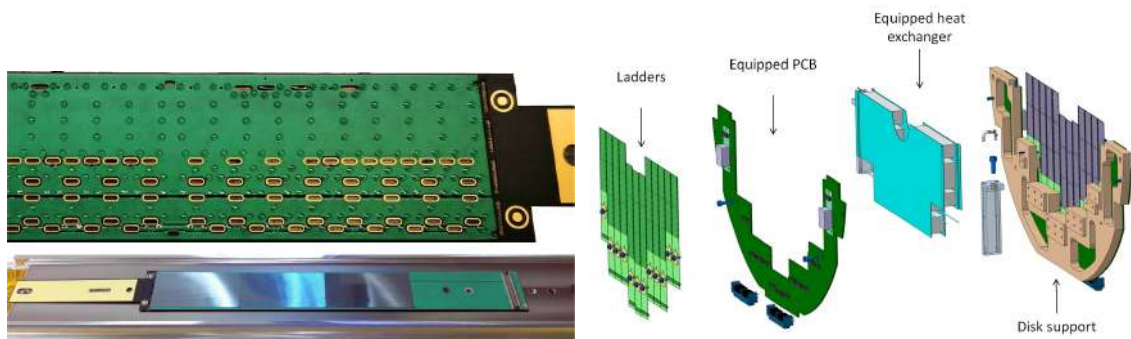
(Left) Back and front sides of an assembled ladder, (right) Detailed view of the assembly of a MFT half-disk [134].
